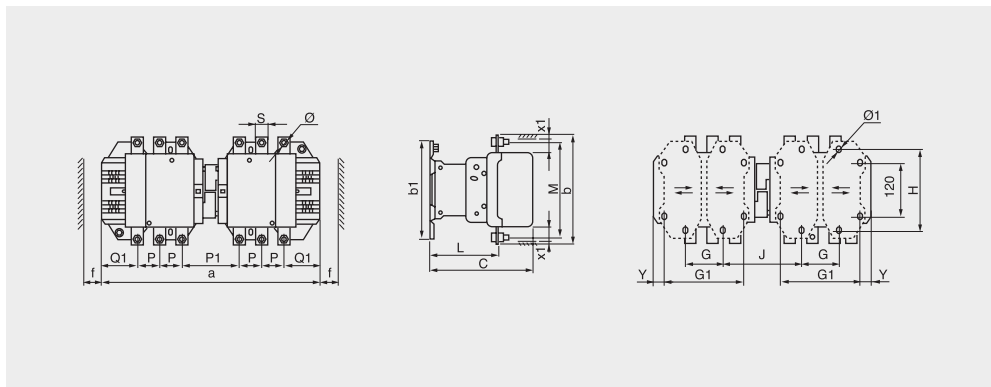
CJX2-F630N~F800N, CJX2-620N(Horizontal installation)
